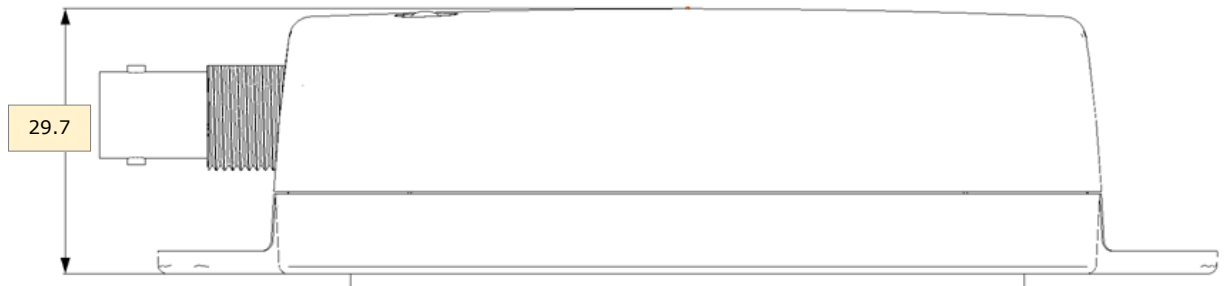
LDSBus ORP Sensor Adapter Dimension – Side View
